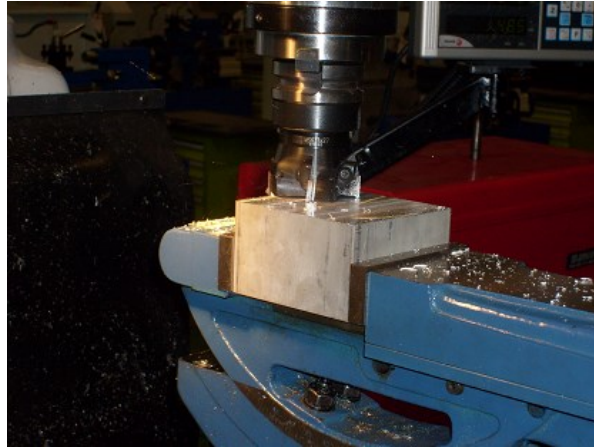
Shows face milling to remove slightly surface of workpiece before start.
